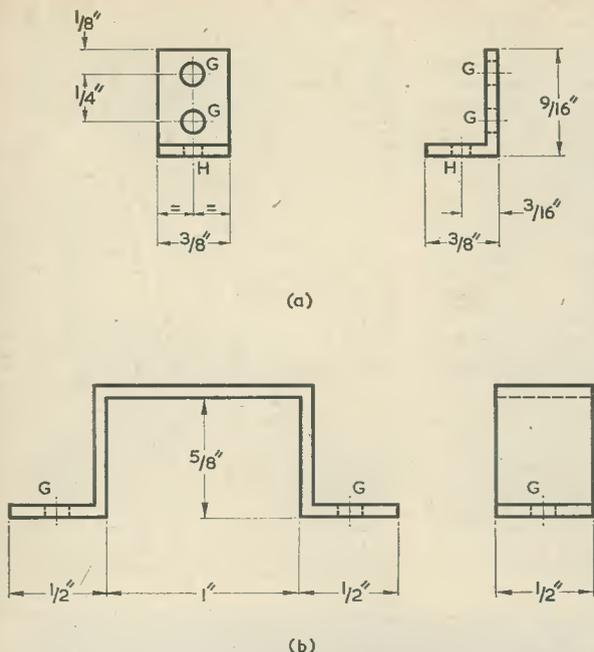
(a). Two bottom cover fixing brackets, made to the dimensions shown here, are required (b). Dimensions of the battery clamp. The hole positions are discussed in the text
